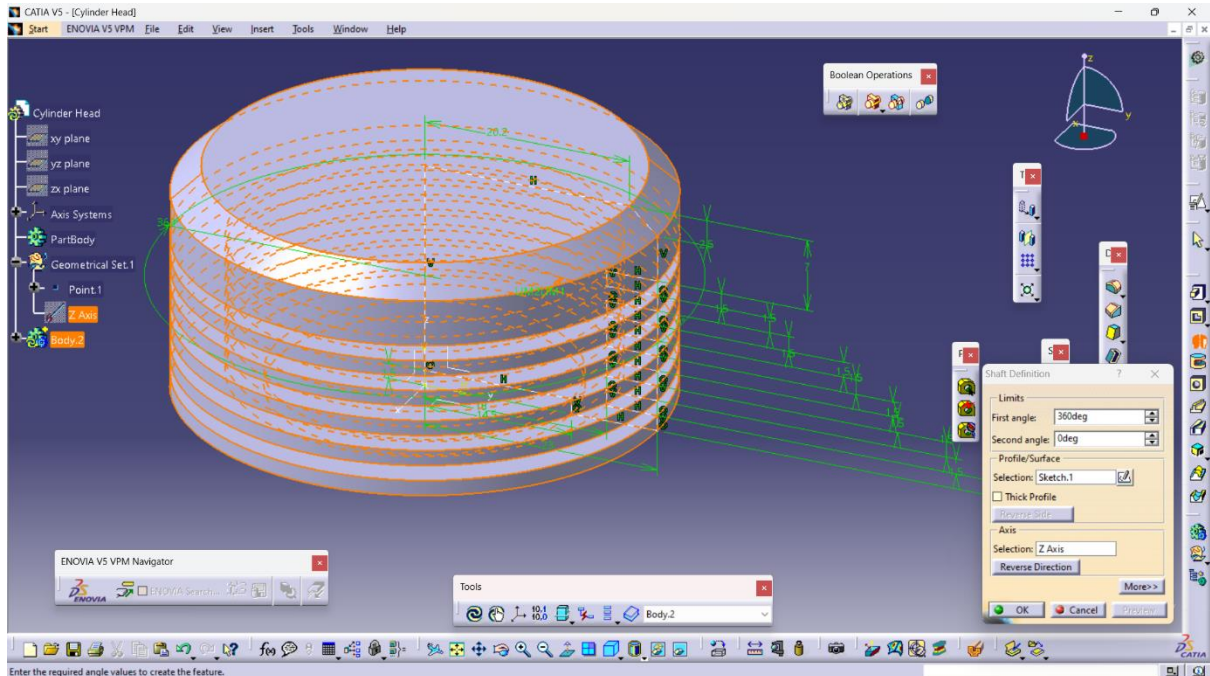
Creating a solid body from Sketch1 using Shaft command
